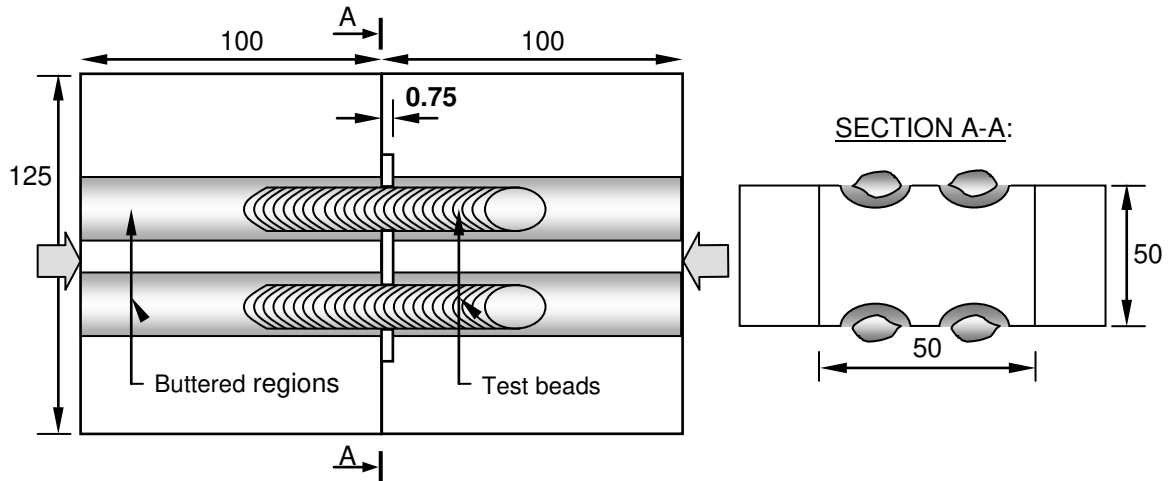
30 A schematic illustration of a modified G-BOP test using buttering prior to the actual test welds (after Hart 1986). Note: all dimensions in millimeters.
